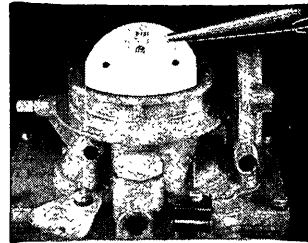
Install choke valve. Seat valve by tapping lightly; hold in place with fingers before tightening screws. Valve or shaft must not bind in any position
